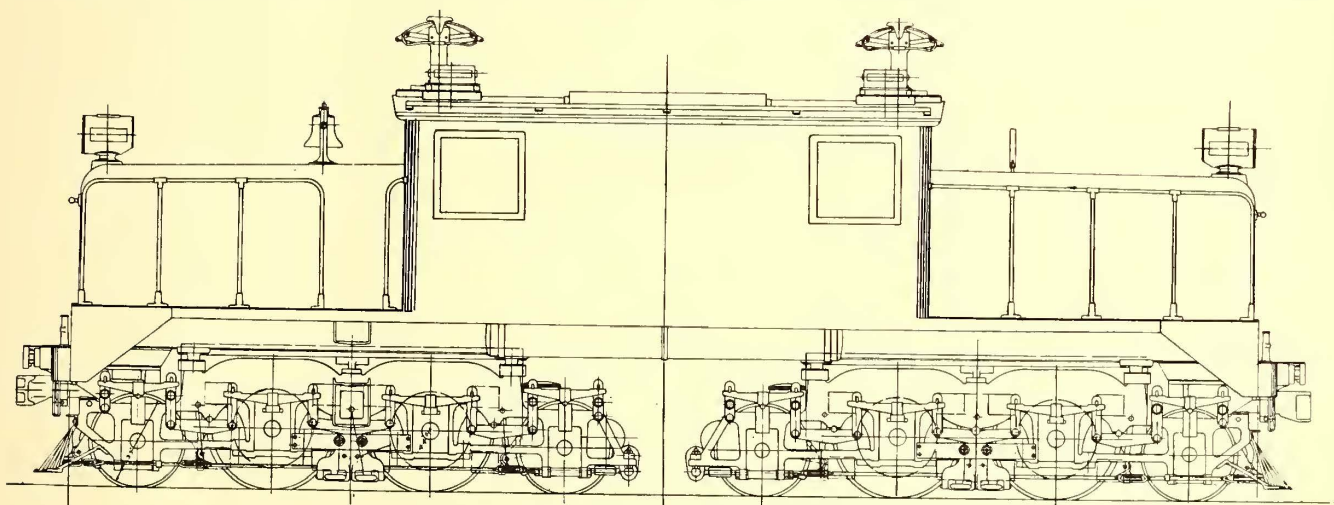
110-TON ELECTRIC LOCOMOTIVE EQUIPPED WITH FOUR GE 84 MOTORS
